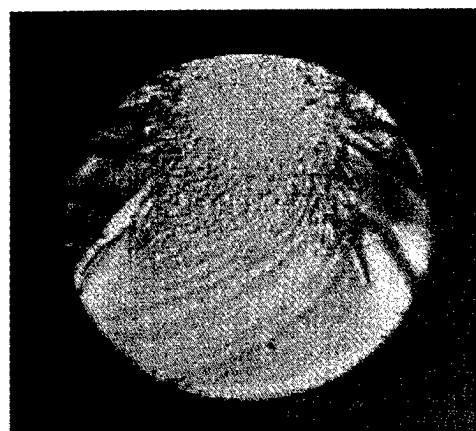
Fracture surface obtained by 213 MPa (31 kpsi) bending and 221 MPa (32 kpsi) tensile stresses.
